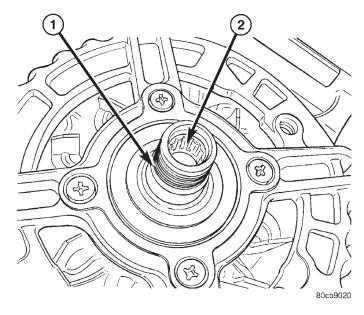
END OF GENERATOR SHAFT (SPLINED)
